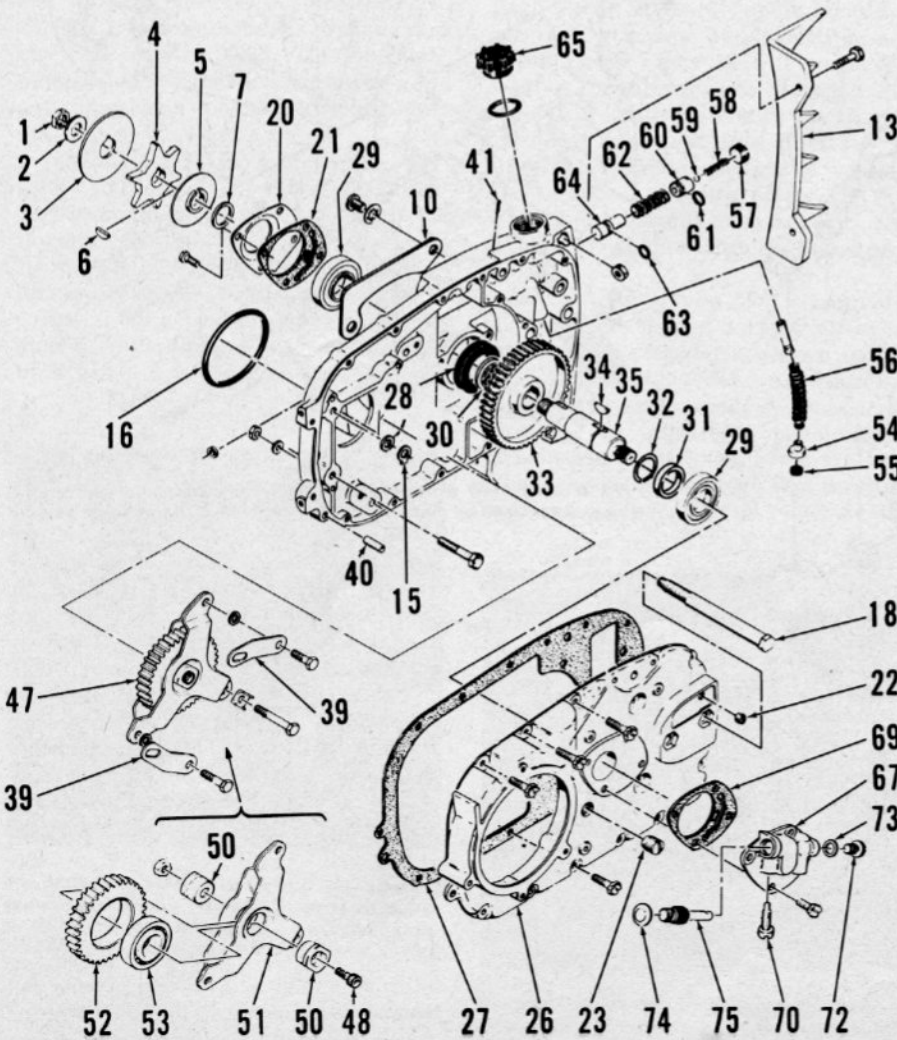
Exploded view of transmission used on models 840, 890, 895 and 895C. Input gear is part of clutch drum (36—Fig. MC5-21). Shims (73) are 0.015 thick.
